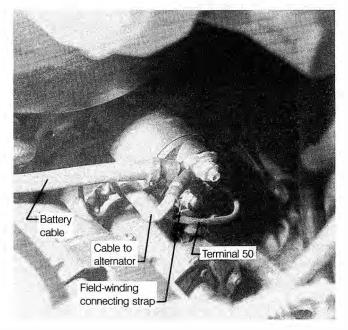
Starter wiring at solenoid. Remove wires shown at arrows. 1988 through 1990 models have an additional wire (not shown).
